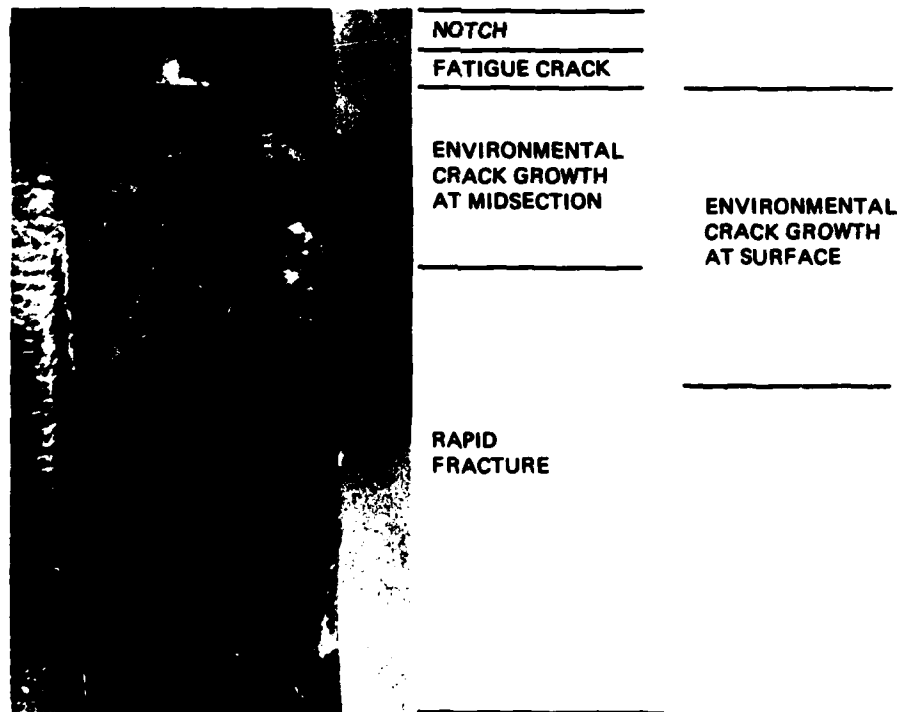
Fracture surface of 9Ni-4Co-0.30C ($K_{I1} = 119.2 \text{ ksi}\sqrt{\text{in.}}$)
